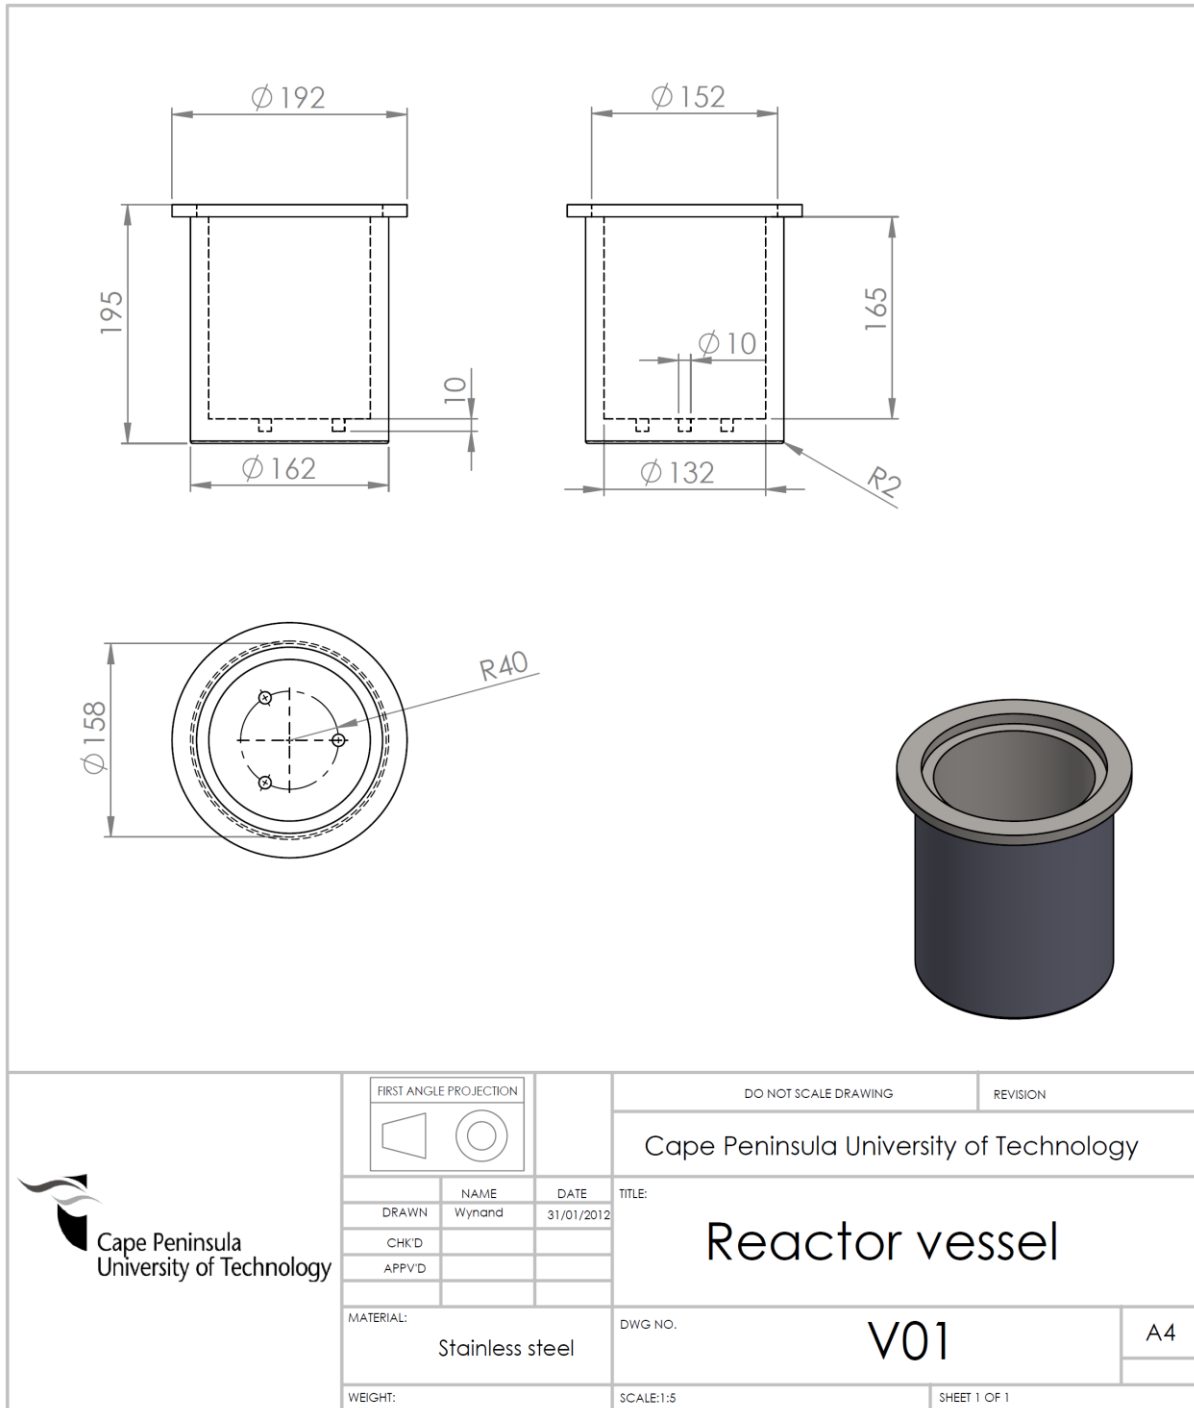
Mechanical detailed drawing of bench scale reactor vessel.
